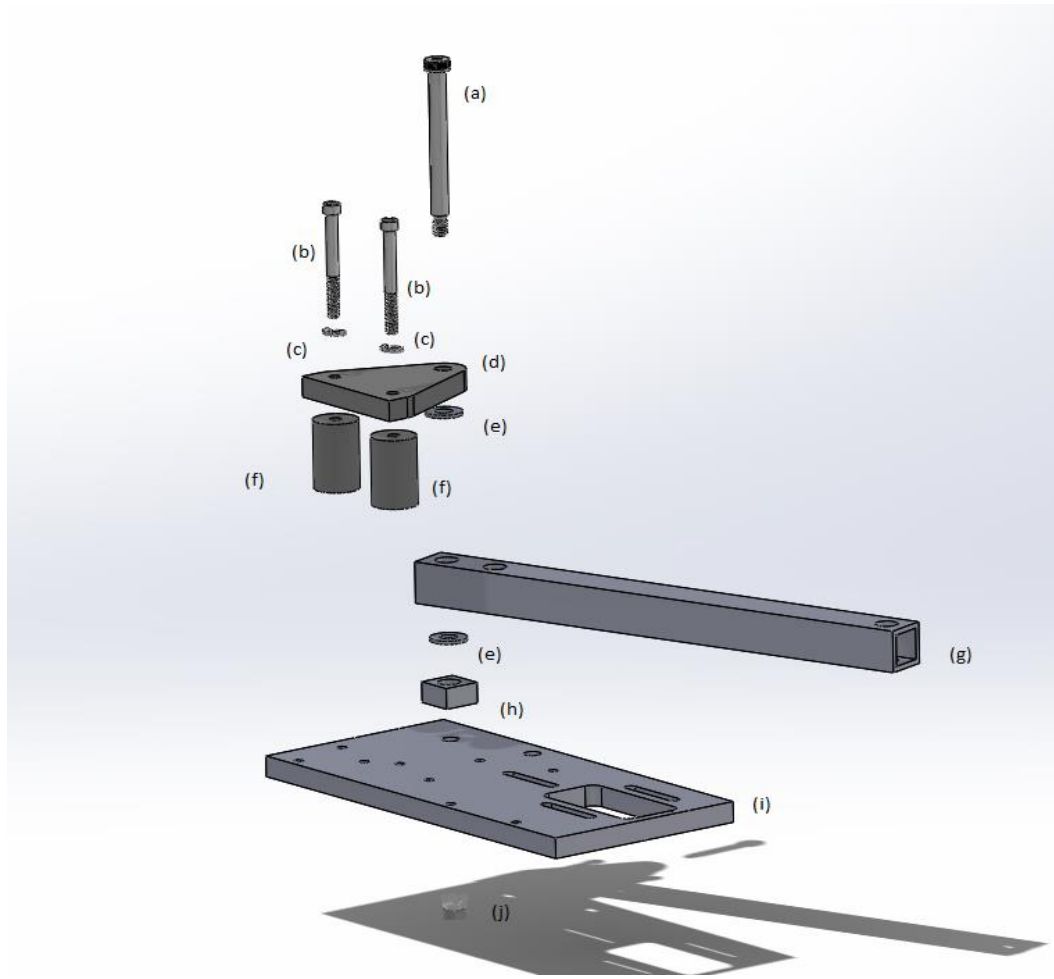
Step 2 & 3 exploded view of input link attachment
